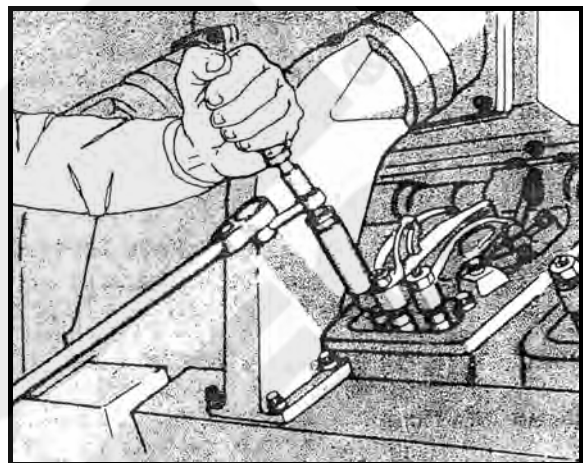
Tighten the lock nut with a ST-669 Adapter
